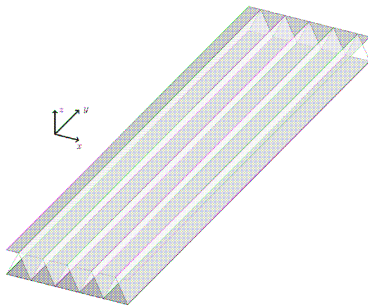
Schematic of a train floor panel with 45° core truss-elements.
